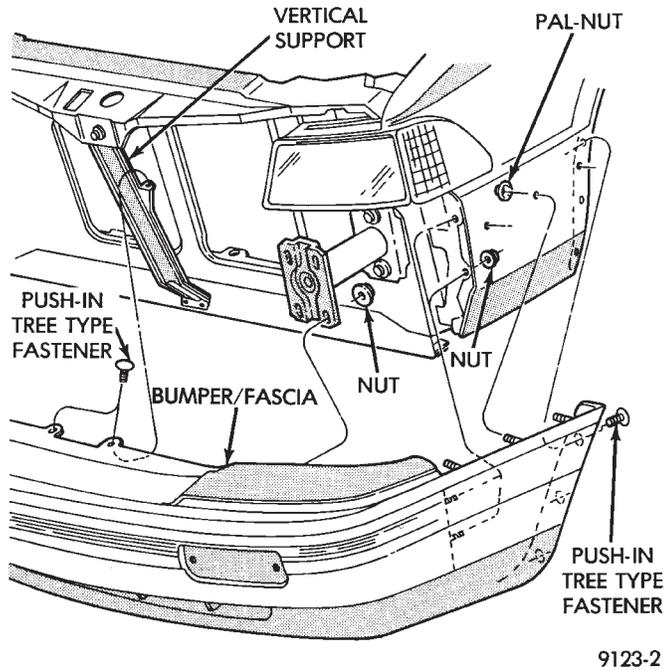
Wrap-around Front Bumper—AA-Vehicle
